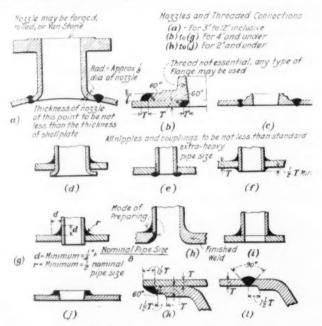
Methods of Autogenous Welding Nozzles
